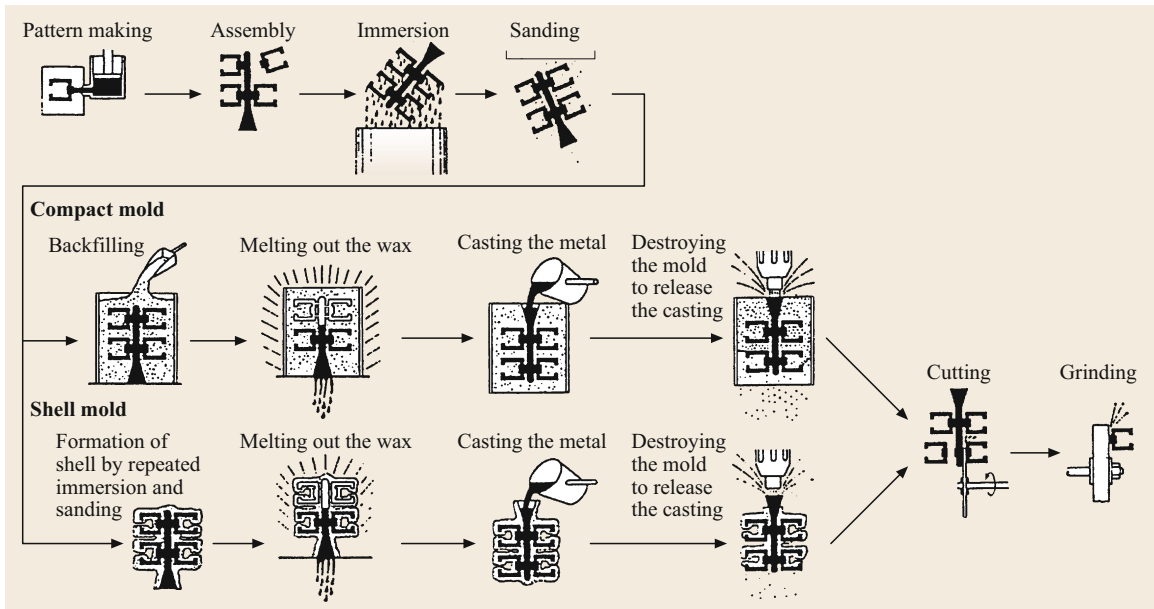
Schematic of manufacturing stages in investment casting [10.1, 6]
